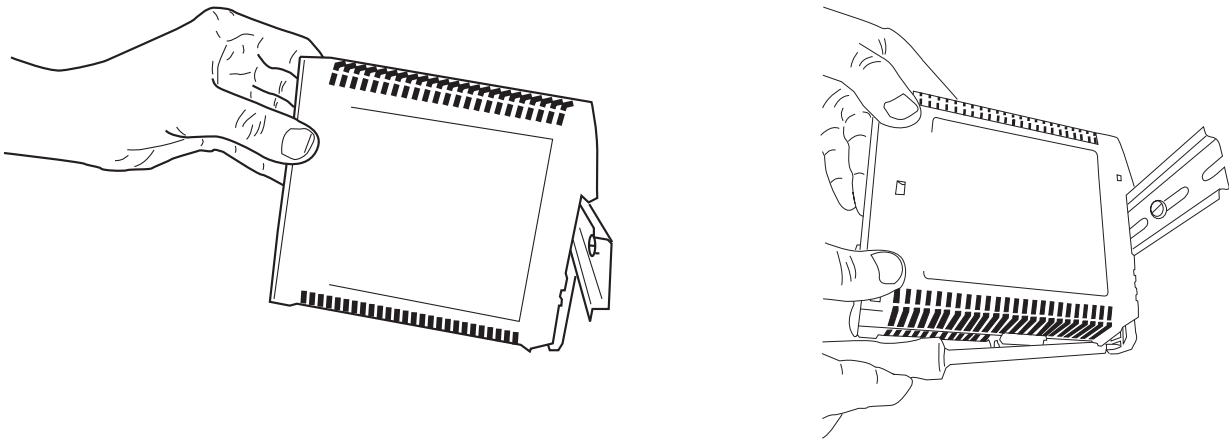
Mounting of the VT-HMC...1X on the DIN mounting rail
